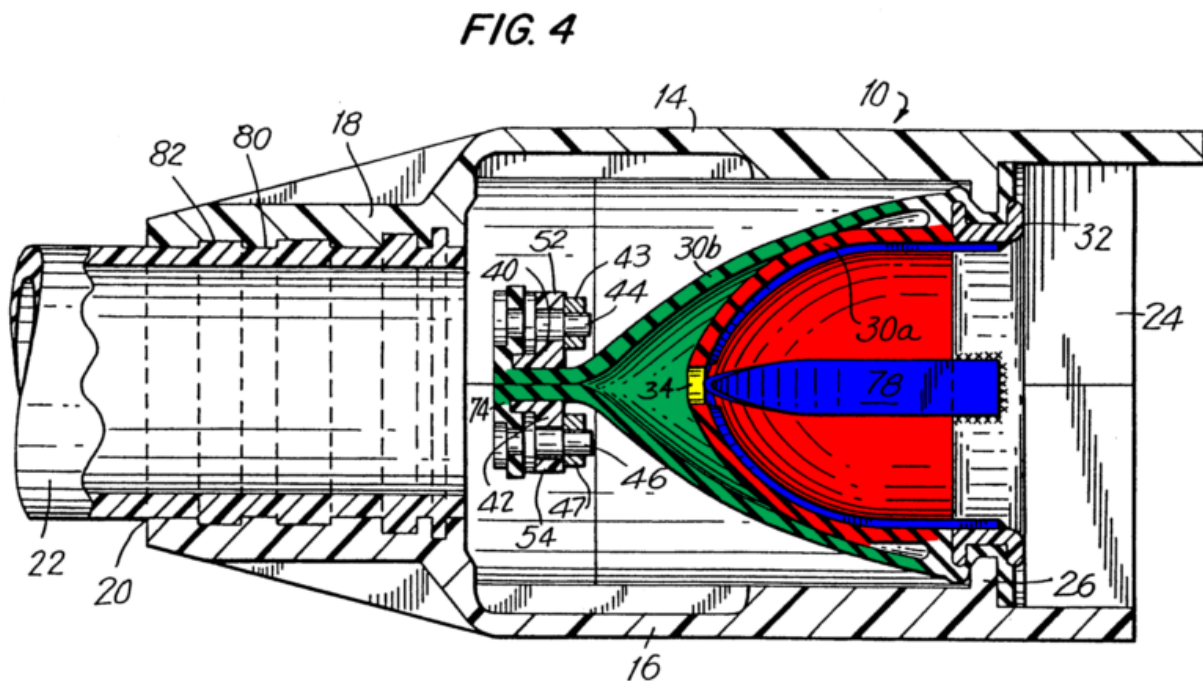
illustrates the flexible fingers 78 (highlighted in blue) which engage with an inserted instrument and spread the valve member 30a (highlighted in red) to expand the aperture 34 (highlighted in yellow). Another valve member 30b is shown highlighted in green. When assembled, the fingers “are sufficiently thin and flexible such that insertion into inner wall 30a of diaphragm 30 causes them to
